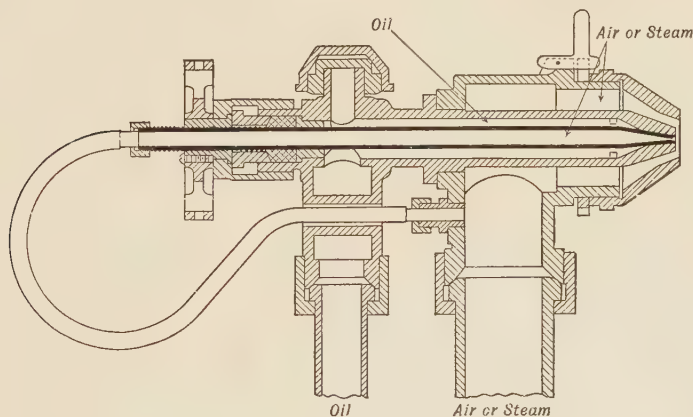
Atomizer with air or steam admitted both inside and outside of fuel stream.
